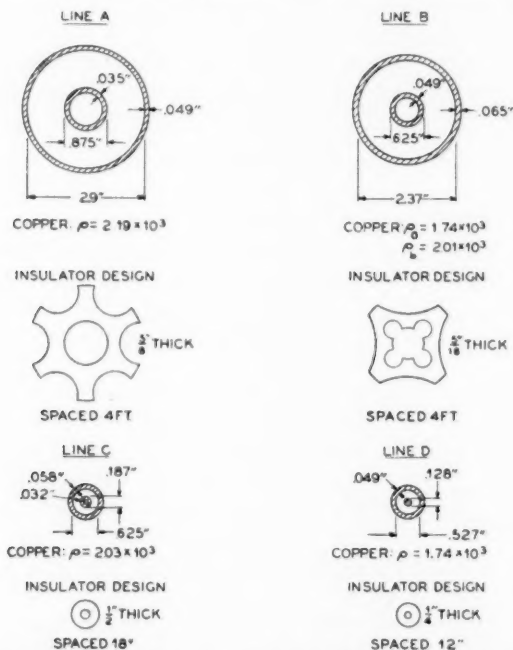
Principal dimensions of the concentric tube lines upon which the experimental resistance measurements shown in Fig. 2 were made.
